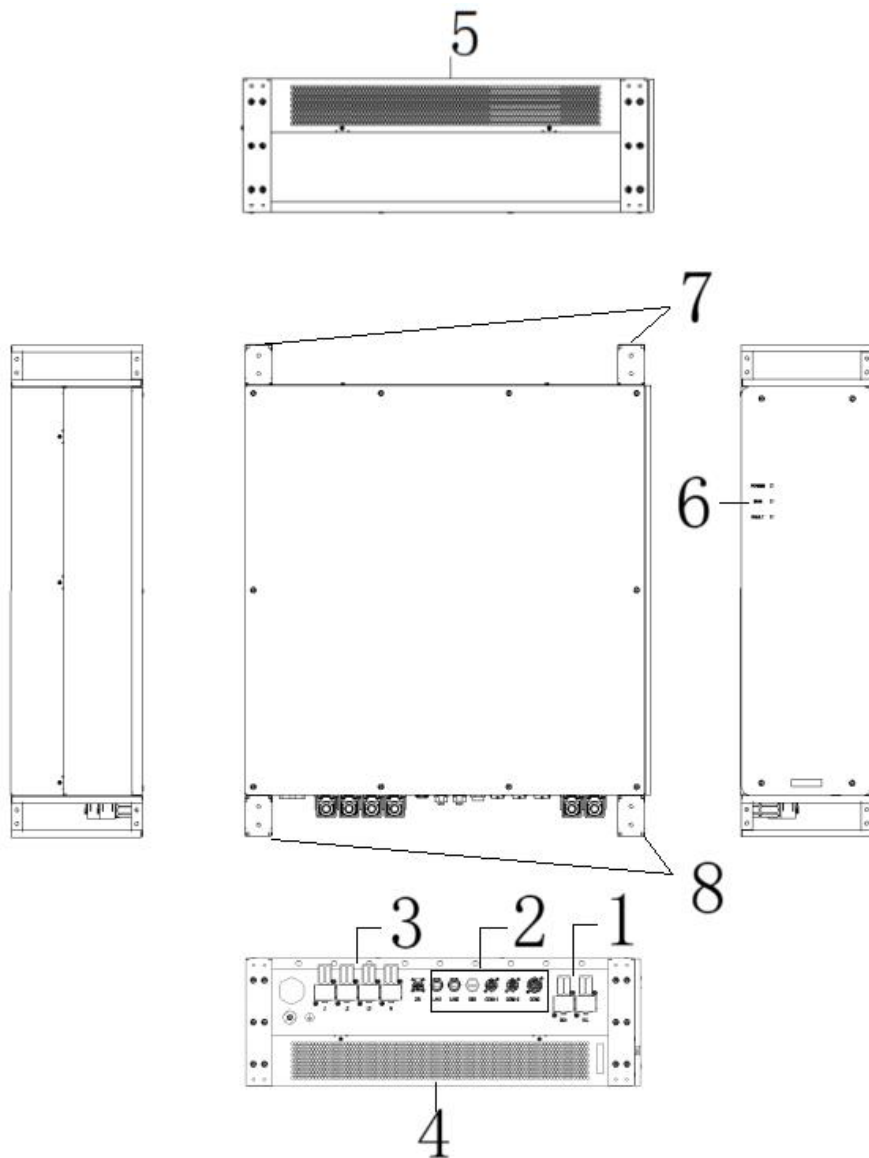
Appearance of PCS module (Refer to the drawing for details)
